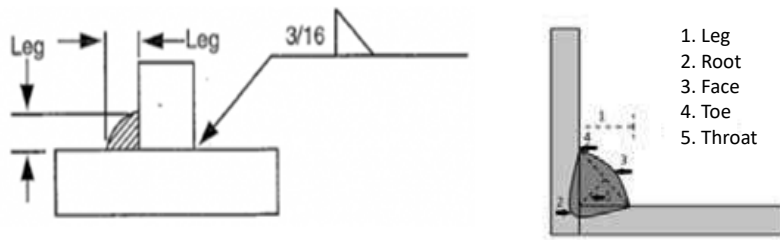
Basic Welding Symbols-AWS
